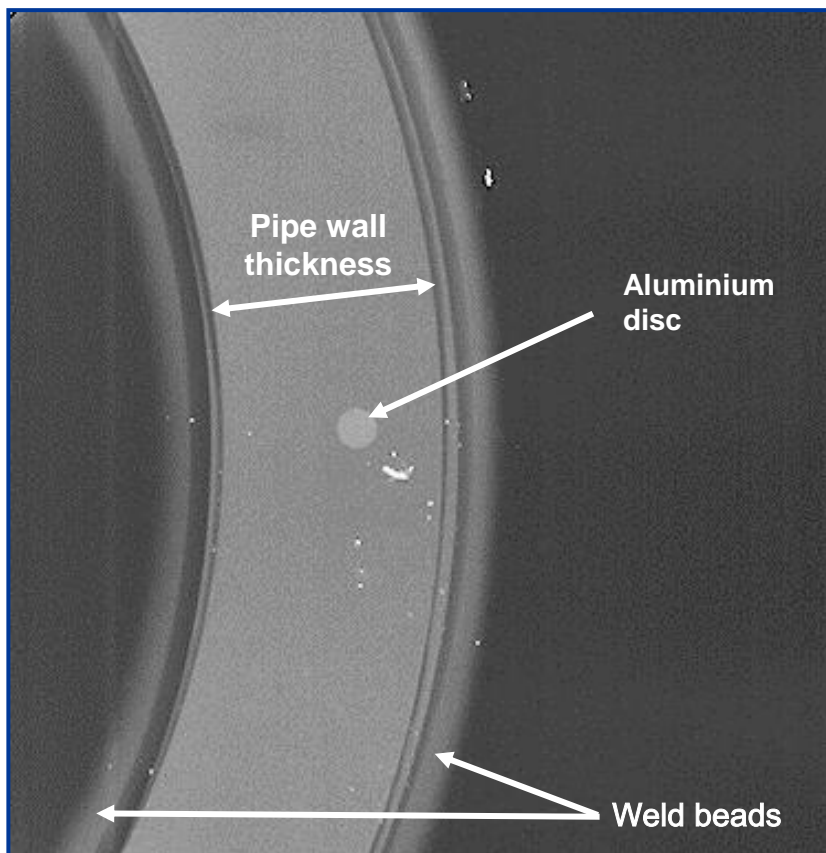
X-ray radiograph of butt fusion weld containing an aluminium disc.
